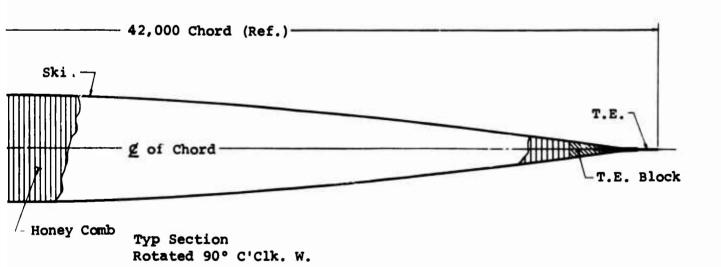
Steel Hexagonal-Spar Rotor Blade.
